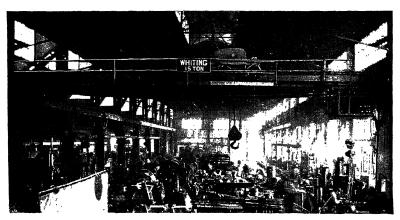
General handling crane. Fifteen-ton, three-motor Tiger crane, 46-ft 10-in. span, 20-ft lift, used in a general machine shop. Used for all heavy-material handling except localized handling by some small jib cranes. (Whiting.)
